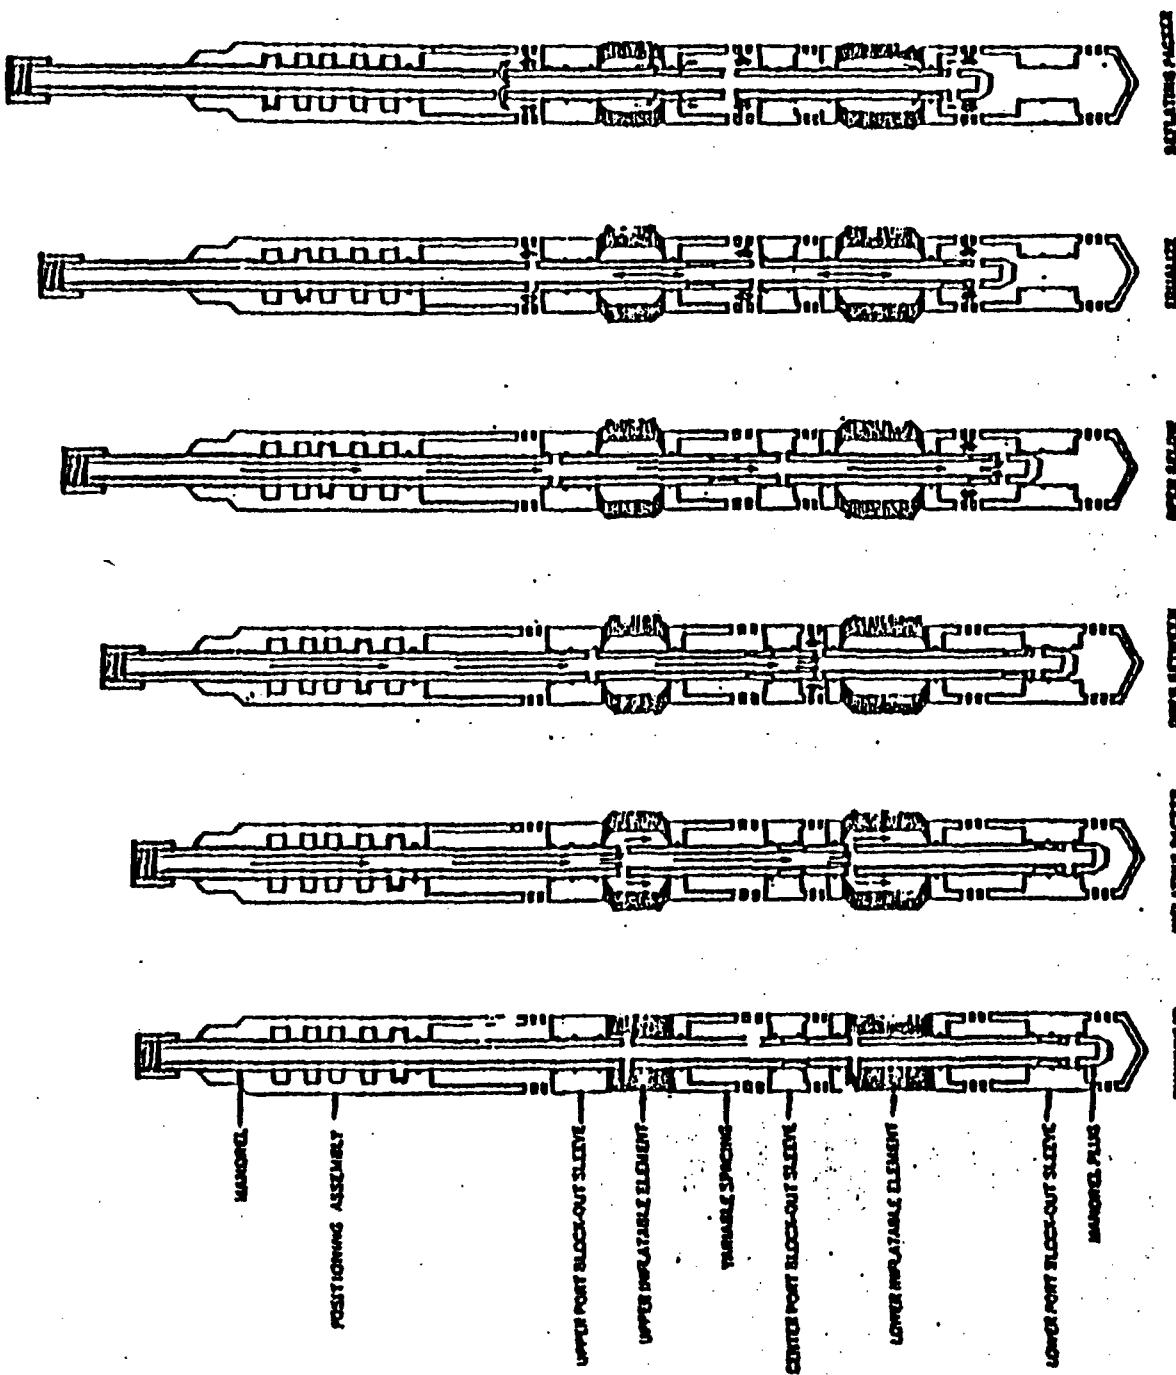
Inflatable straddle packer used in open hole or casing.
